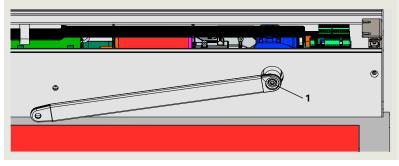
Drive arm installed on ED100/ED250 spindle
